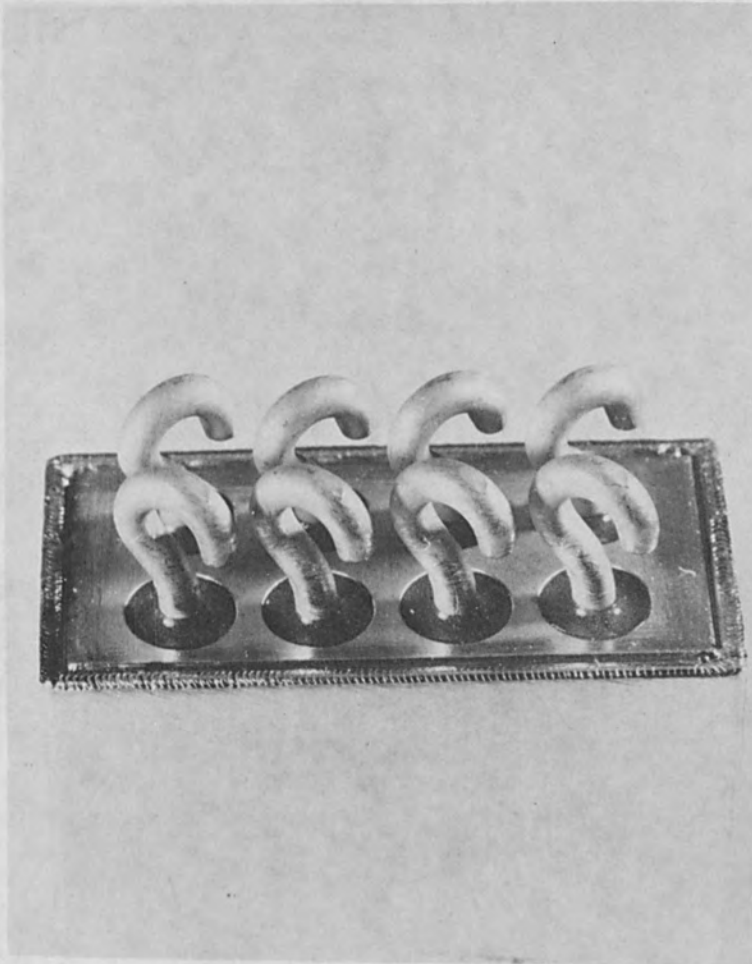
Shows a relay case which has been Laser welded to the heater. In this application, heat build up from the Laser process could not possibly cause cracking of the glass or ceramic insulator material.
